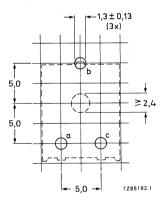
Hole pattern for horizontal versions, viewed from component side.
